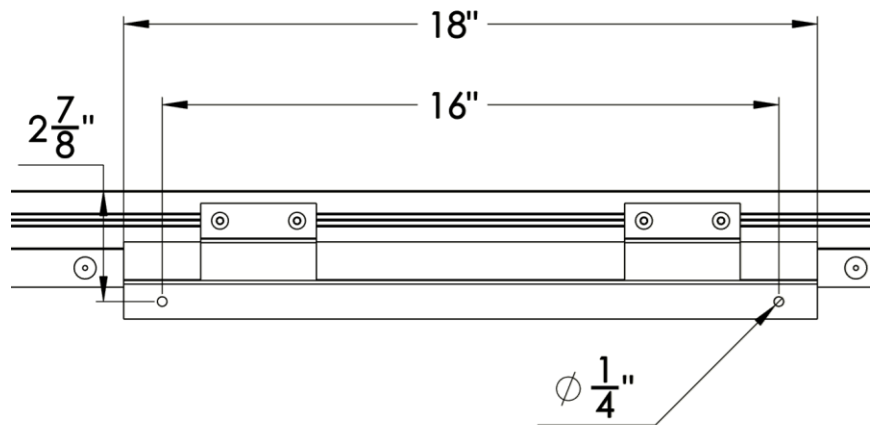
Rear view drawing of WSDQ with EZ Mount G2 showing vital dimensions of bracket that goes to wall.
